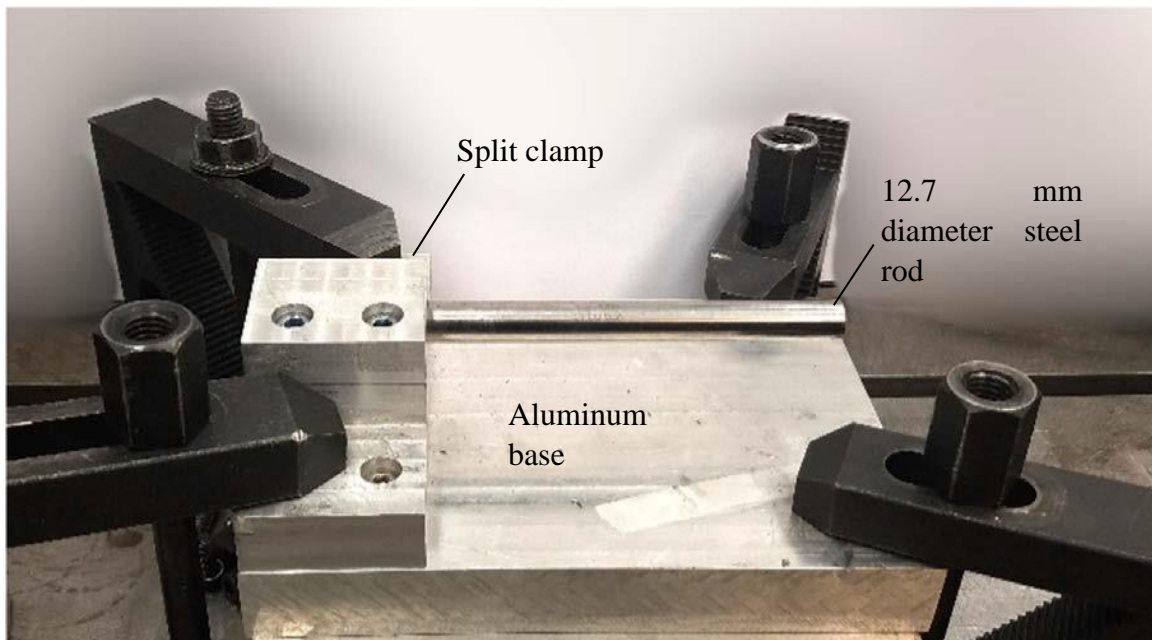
12.7 mm diameter steel rod setup.
